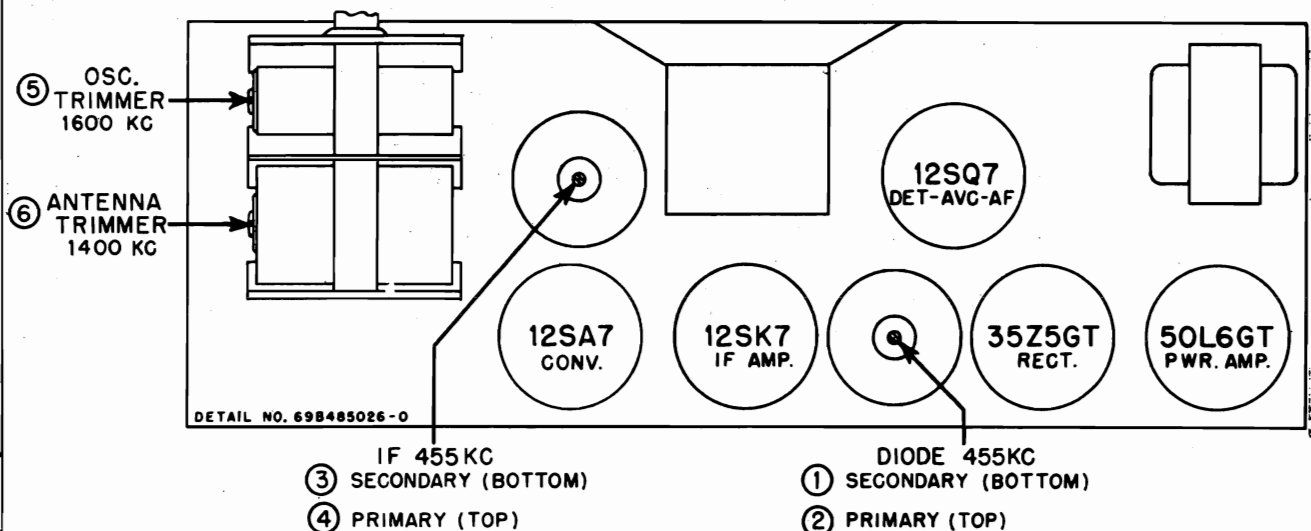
CHASSIS HS-125 TUBE & TRIMMER LOCATIONS
